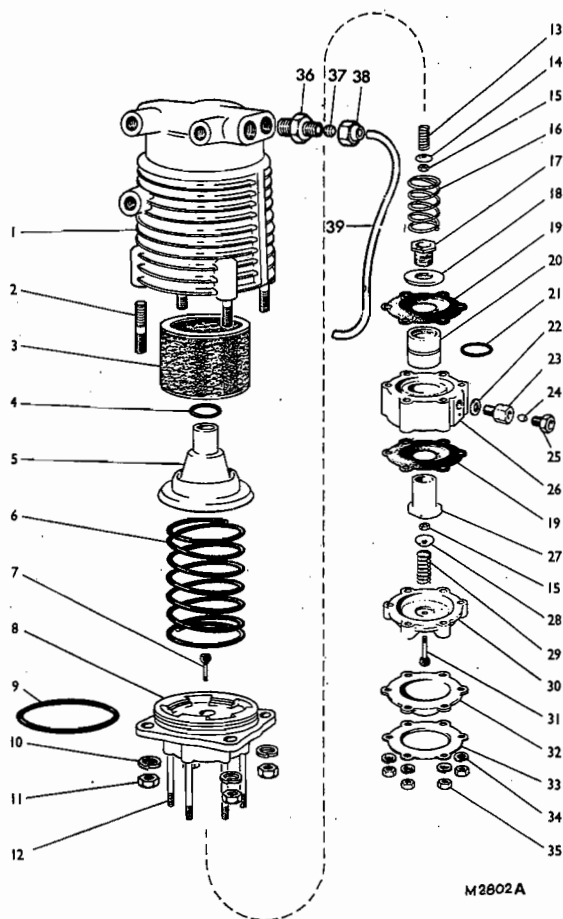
EXPLODED VIEW OF CONDENSER AND DRAIN VALVE
